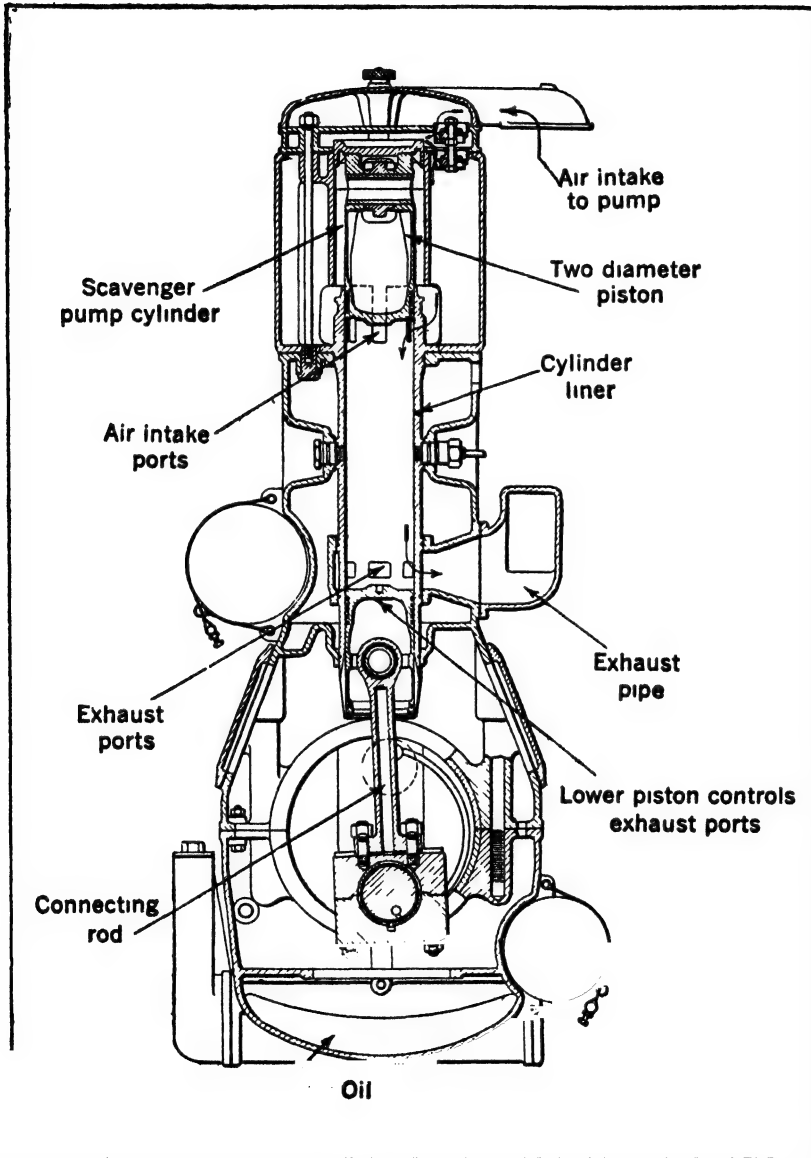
Transverse Sectional View of Peugeot-Junkers Double Piston Type, Two-Cycle Oil Injection Engine.
